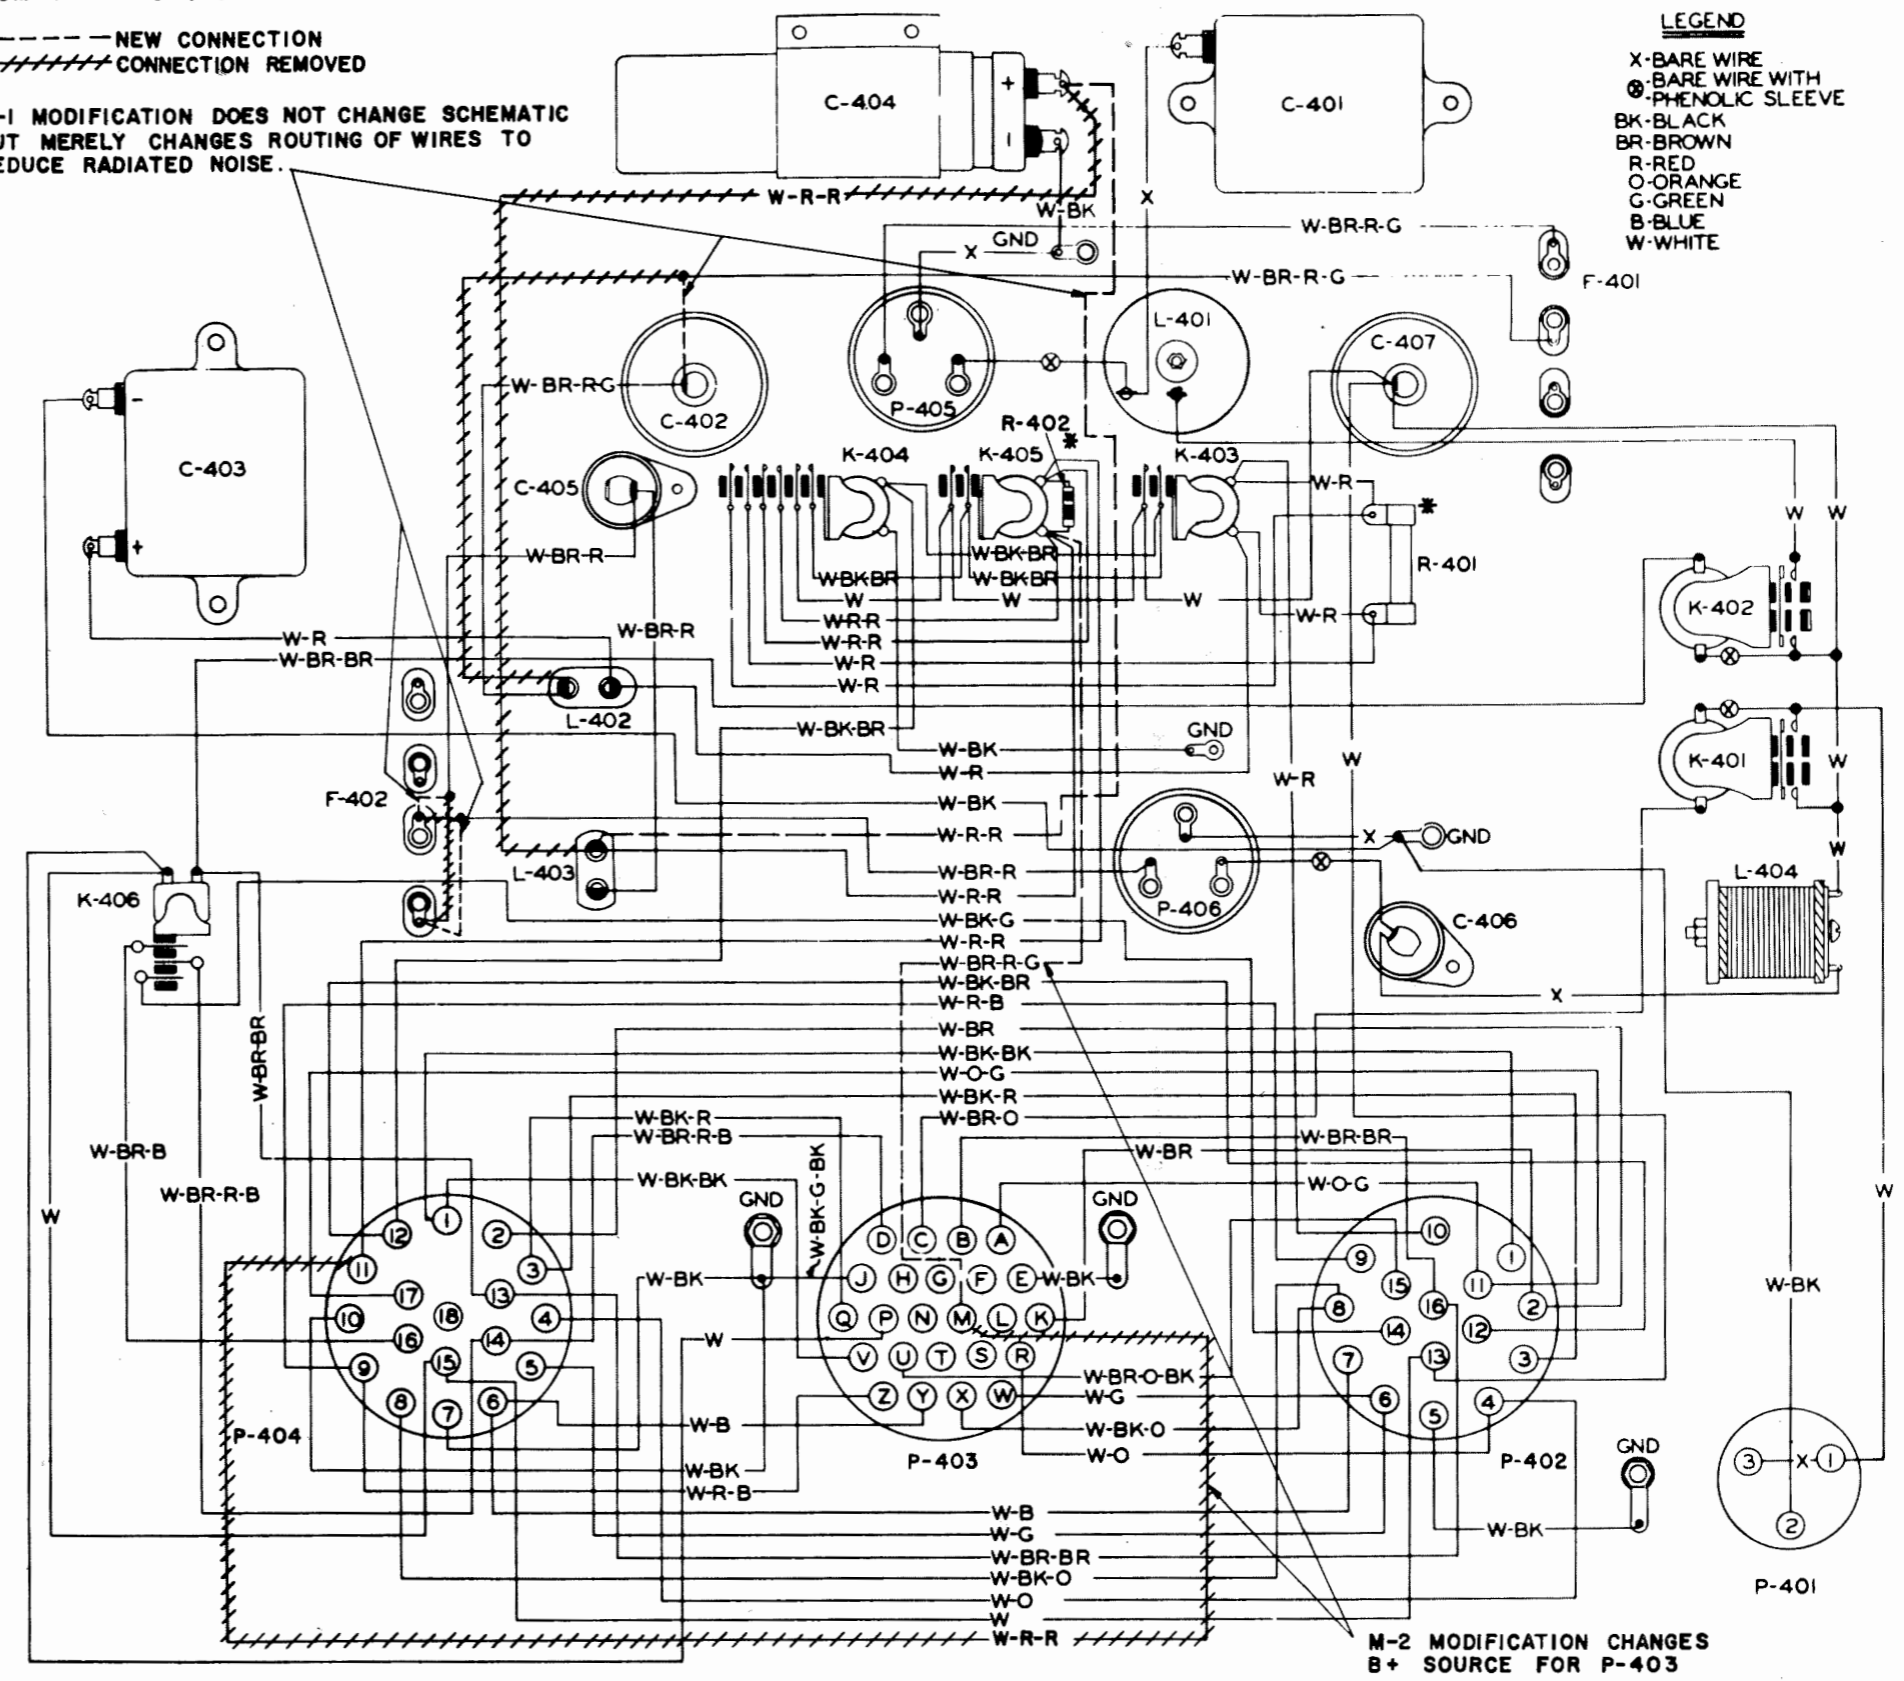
Radio Receiver—Coil Assembly Wiring Diagram
